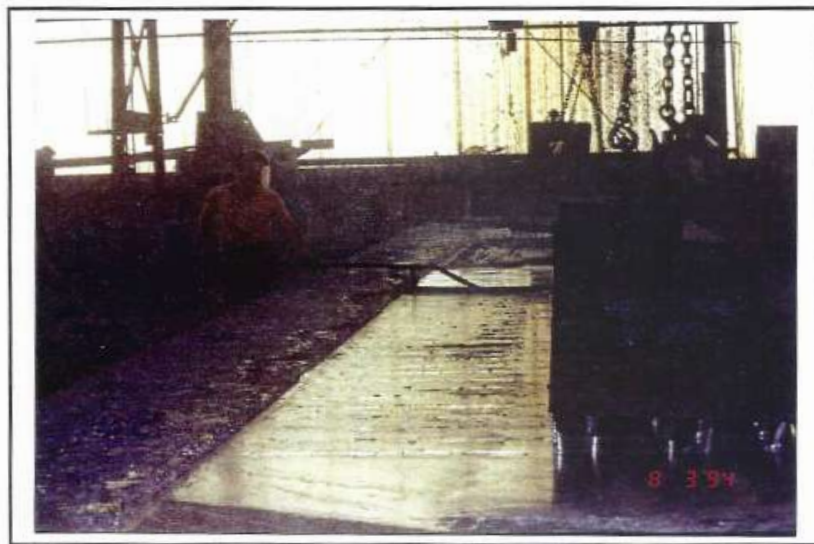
Plant worker removing ash from the top of the zinc bath prior to the material entering the bath.
